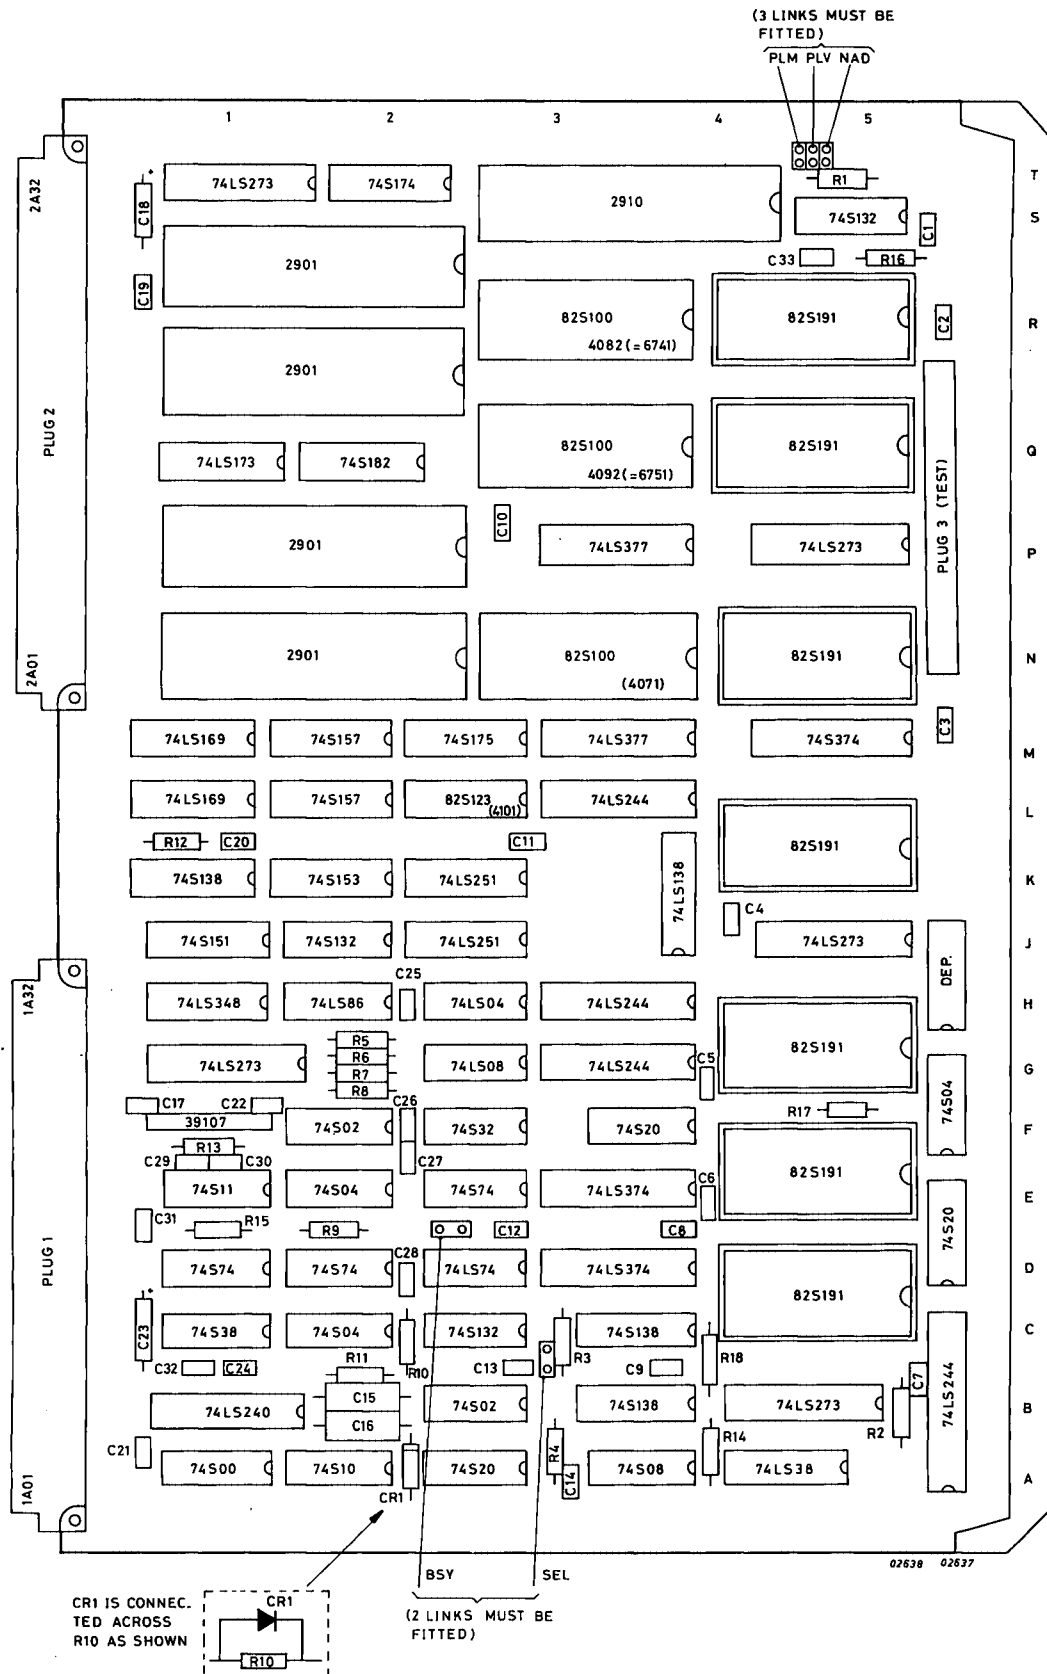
C7E1B COMPONENT LAYOUT AND LINKS
